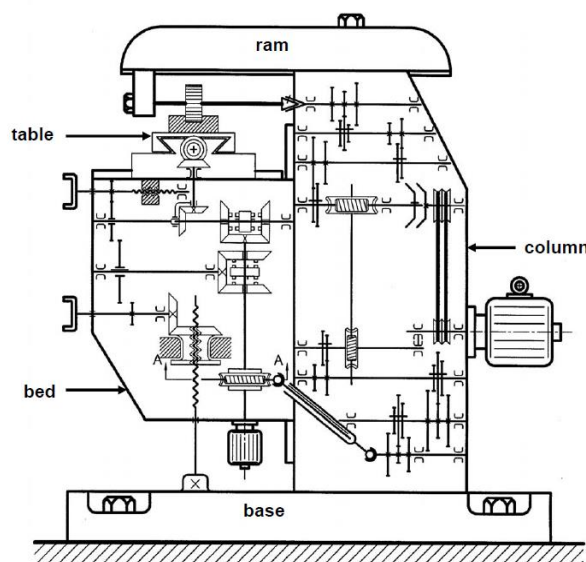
Kinematic diagram of a horizontal milling machine [21]
